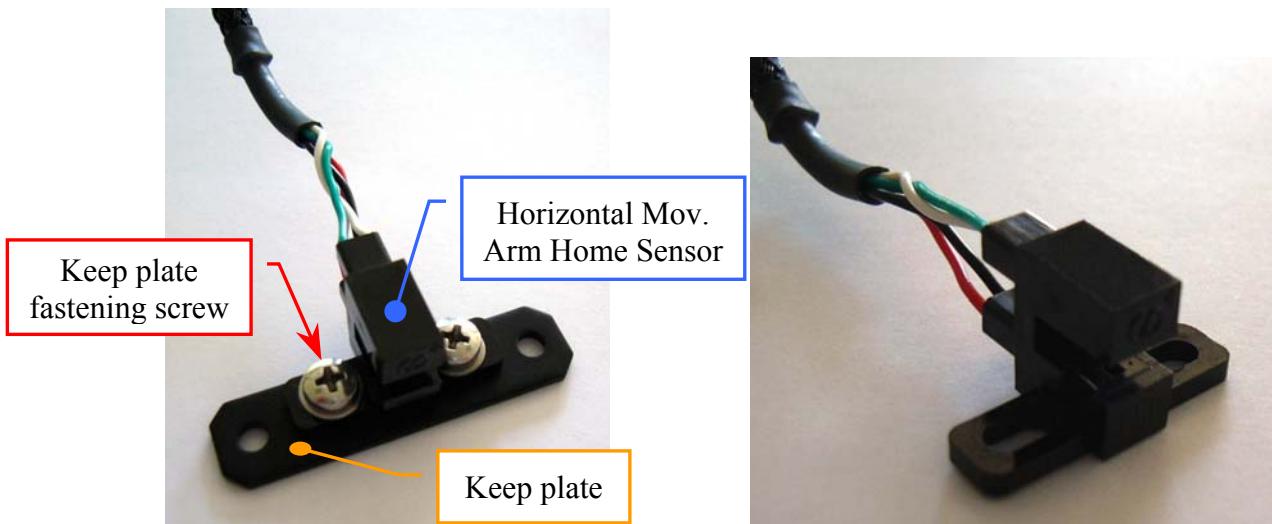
Keep plate fastening screws of the Horizontal Mov. Arm Home Sensor
